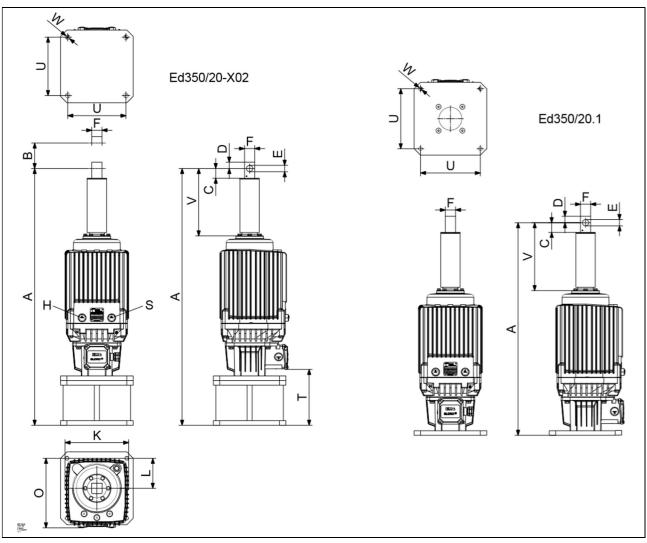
Dimensional drawing - example: Ed 350/20.1, Ed 350/20-X02
